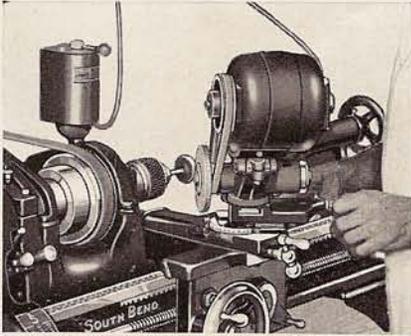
Grinding a Valve Face in the Auto Shop Lathe, using Electric Valve Grinder.
